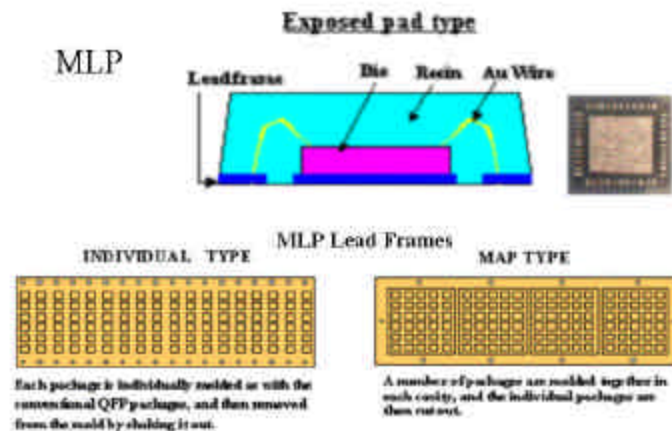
Illustration of a MLP device, lead frames, and an assembly cross section.
